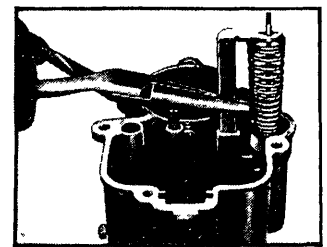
Install complete pump plunger assembly as shown. 1936 and prior models used double piston pump arrangement which should be installed with casting inverted. Inner piston should perforate freely
